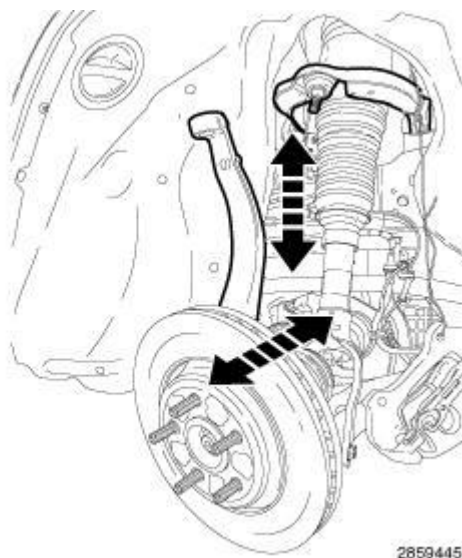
Upper Ball Joint Nut & Half Shaft Hub Bearing Nut
